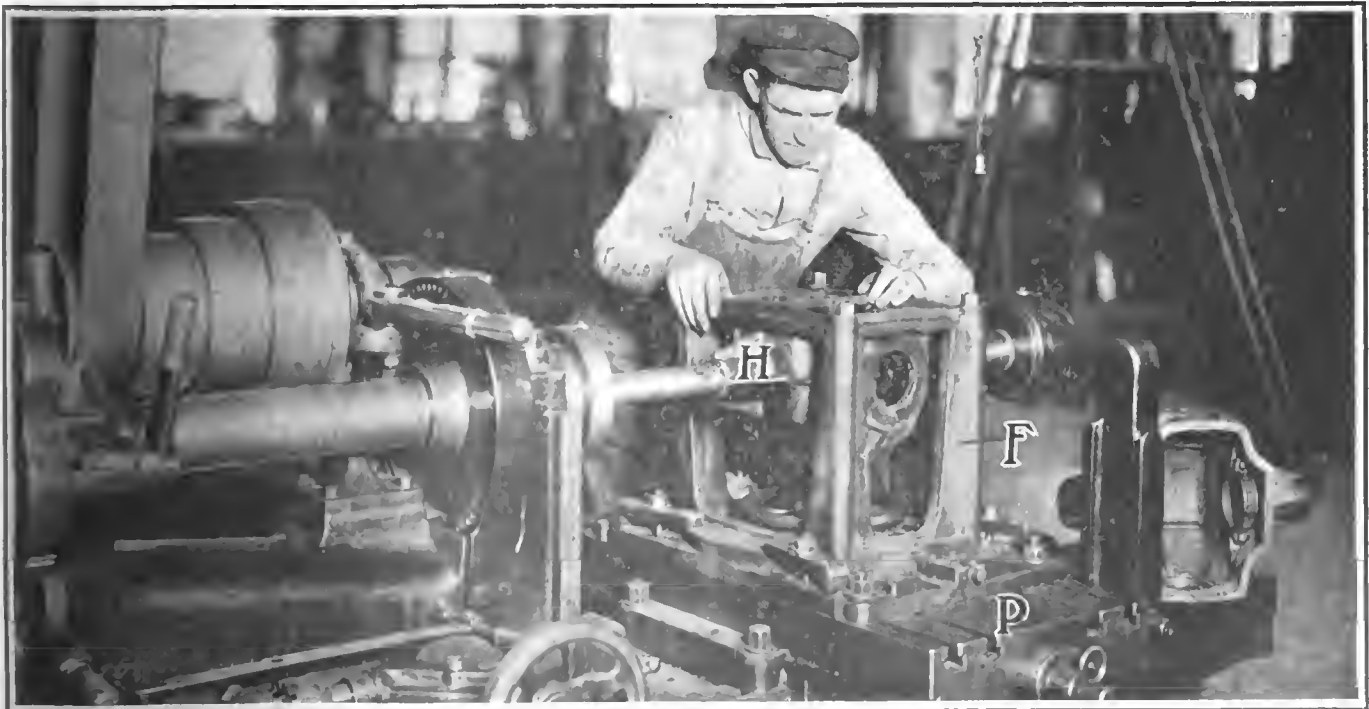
Horizontal boring machine in National plant working on rear axle and differential housing, the work being held in a special fixture. A finished case is shown at the right
